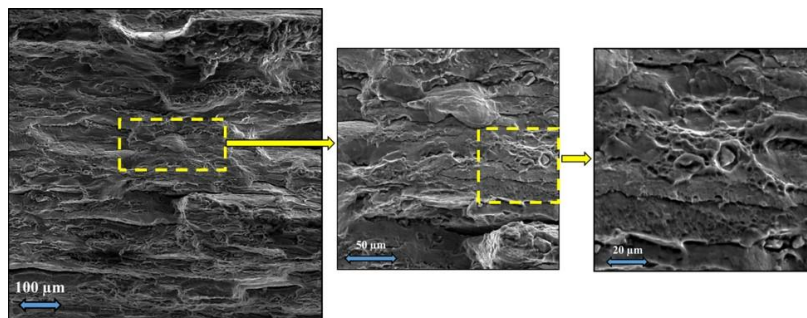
Tensile fracture surfaces of Al/Cu/SiC composite produced by CARB process after eight pass
